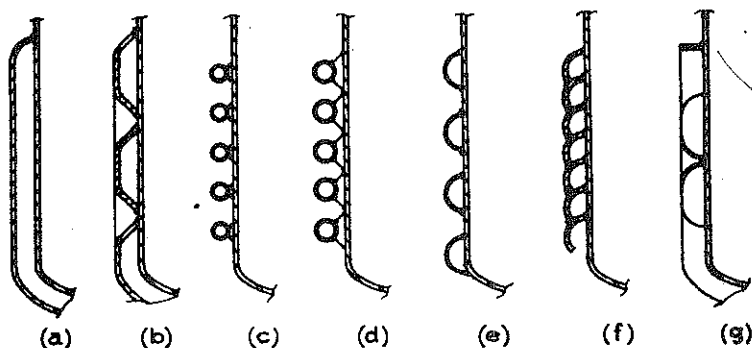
Types of jackets (a) plain (b) channel (c) tube (d) tube with copper strip support (e) half coil (f) overlapped cut coil (g) dimpled construction
